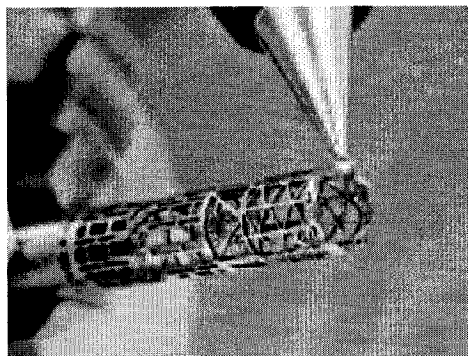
Laser 80 fine cutting technology. (Lasertec Company)
